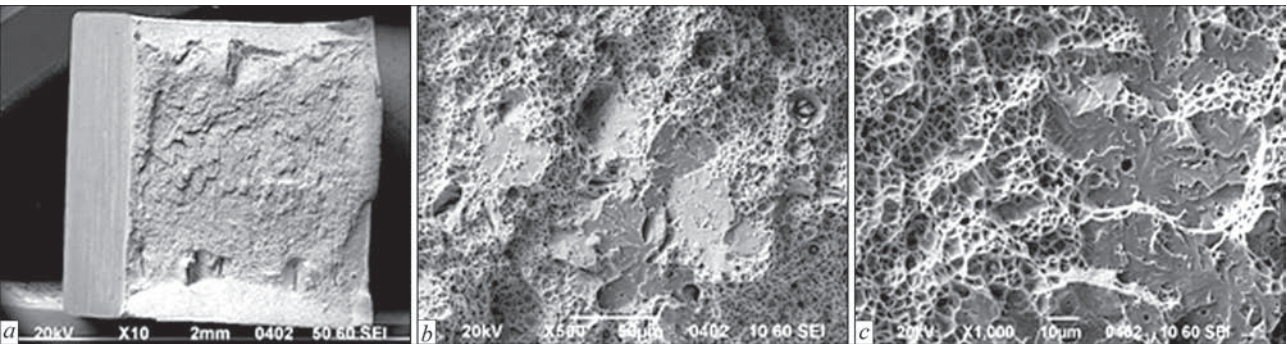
Fractographs of fracture surface of 09G2S steel weld metal specimen after impact bending test at a temperature of $-20\text{ }^{\circ}\text{C}$
